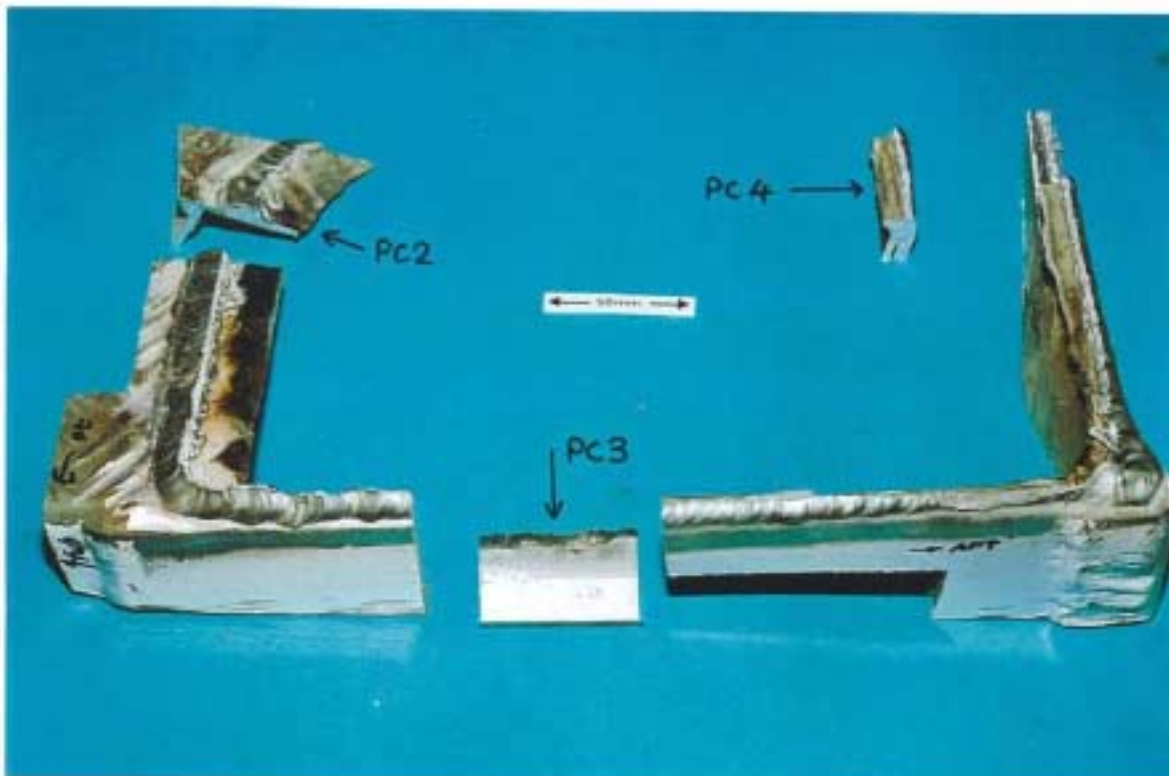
Samples (PC2, PC3 and PC4) from the forward, outboard and aft weld sides, and which were subjected to detailed examination.
